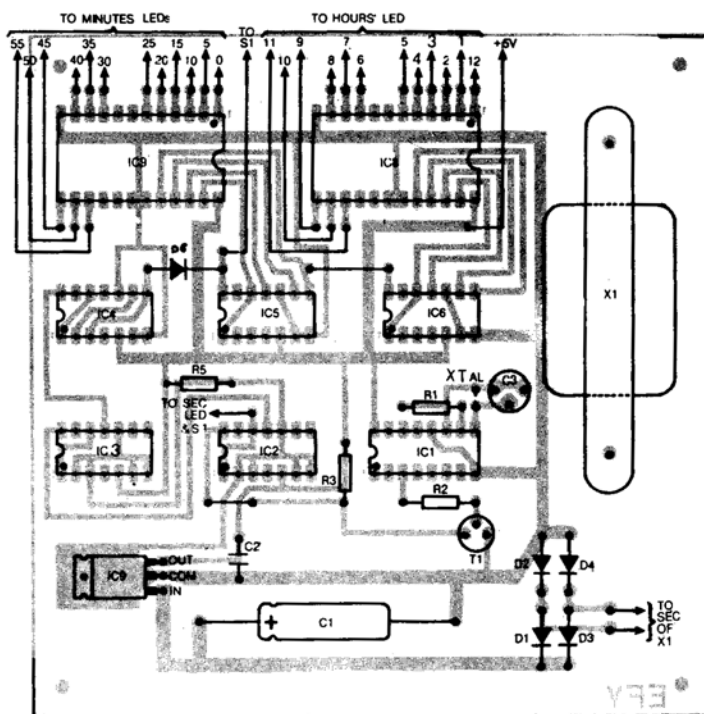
Components layout for the second PCB shown in Fig. 3.
